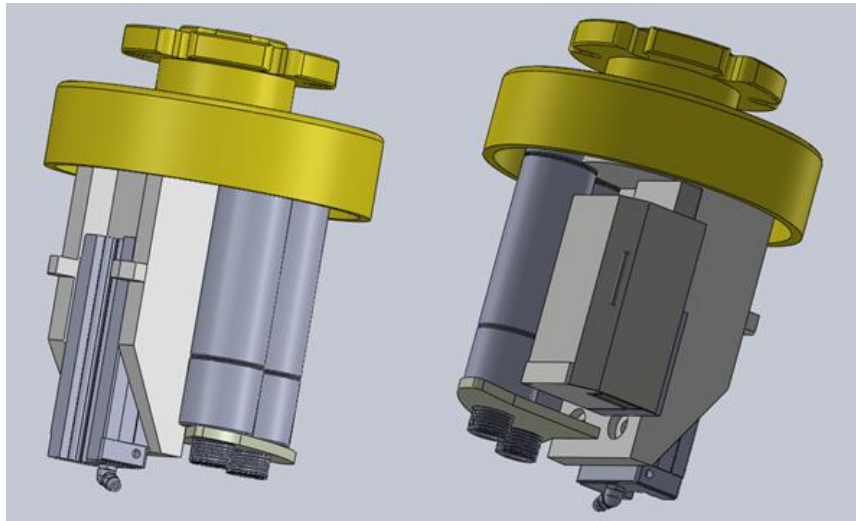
IDC_upper_part consisting of cylinder tubes, the bearing of the sliding mechanism, valve system, sensors.
